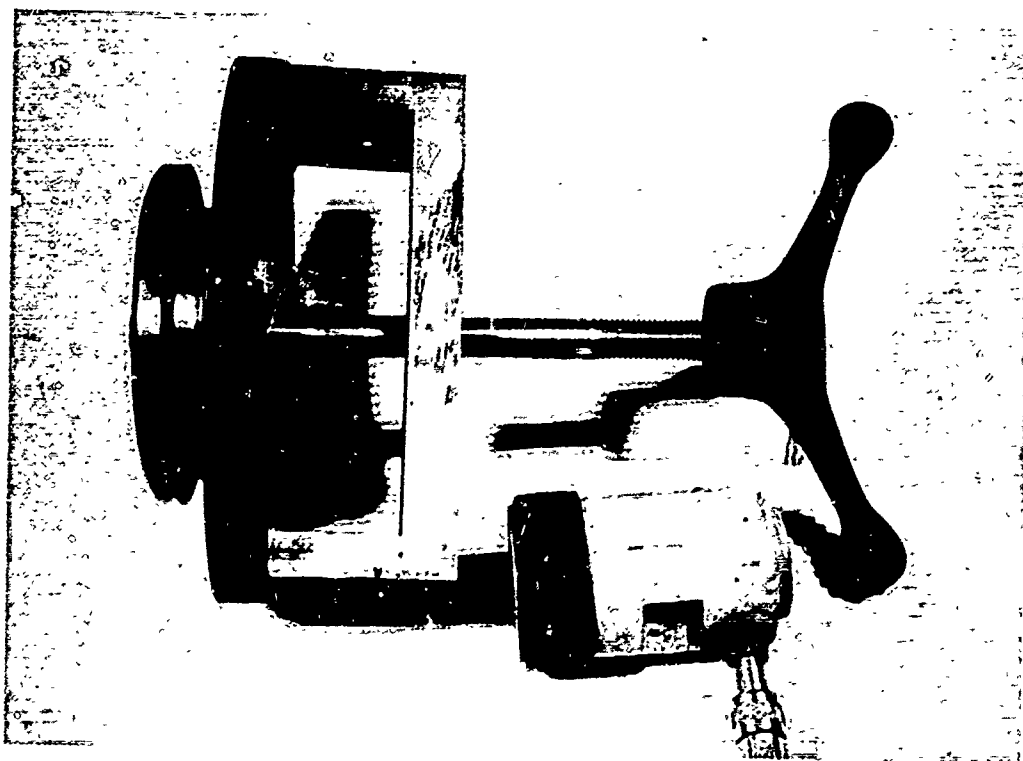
BALL BEARING OUTER RACE PULLER
